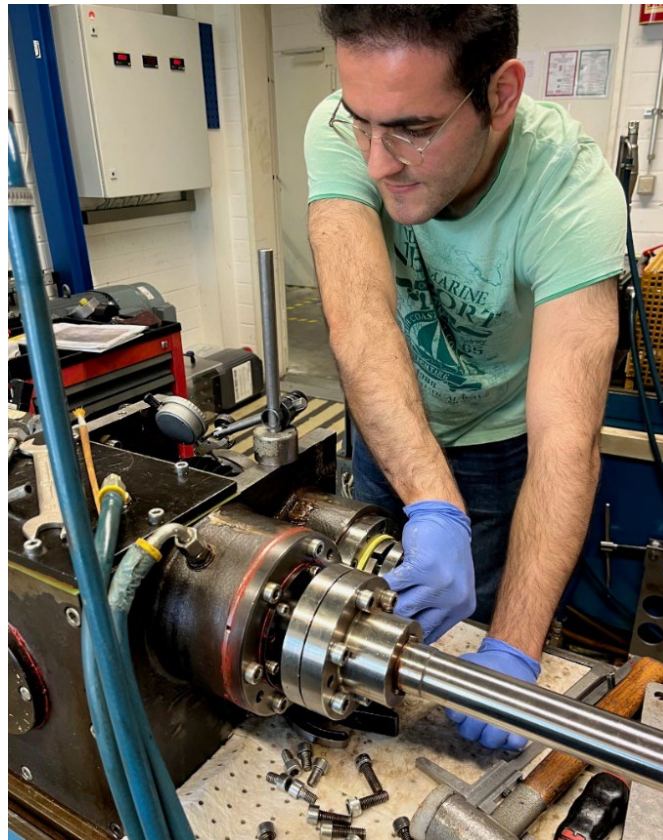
Gear Set Assembly Process / Backlash Measurement
